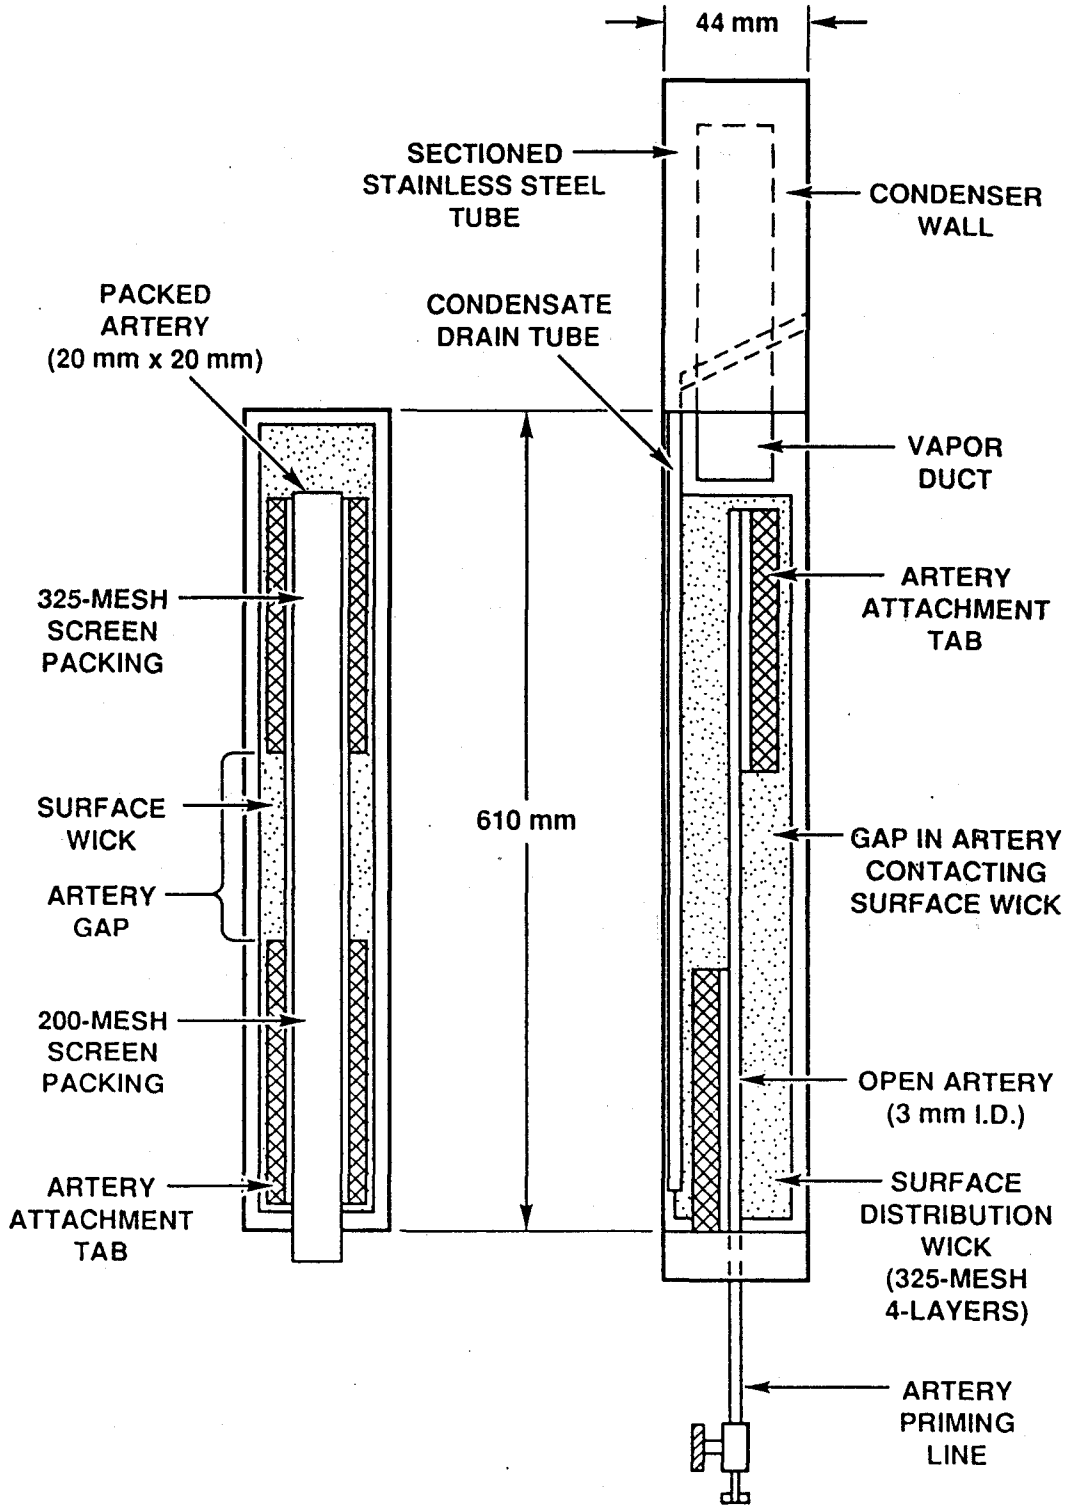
Construction of the bench-scale heat-pipe that will be used to test the performance of open and packed artery designs.
